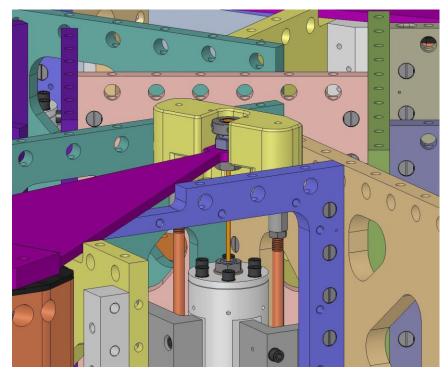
Bolt the Flexure Lower Plates to the Flexure Posts.
